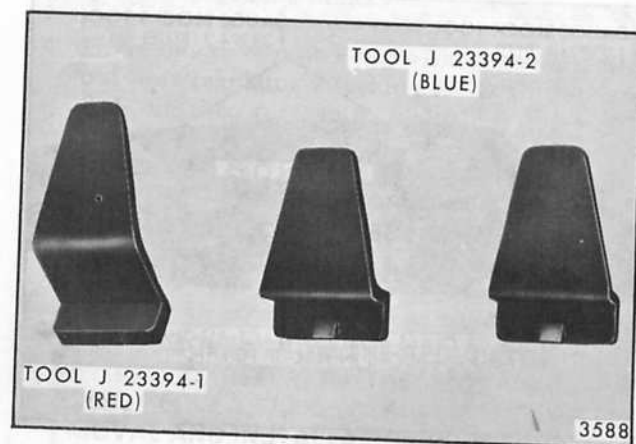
Glass Alignment Gauge Blocks - Tool J-23394 or Equivalent (Set of Three Blocks) - "F" Styles
